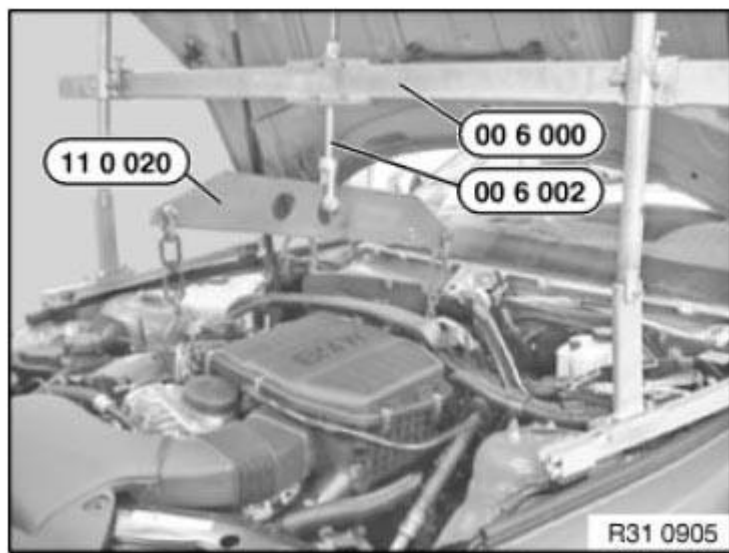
Connecting Special Tool 110 020 To Engine Towing Hook Or Lifting Eye
